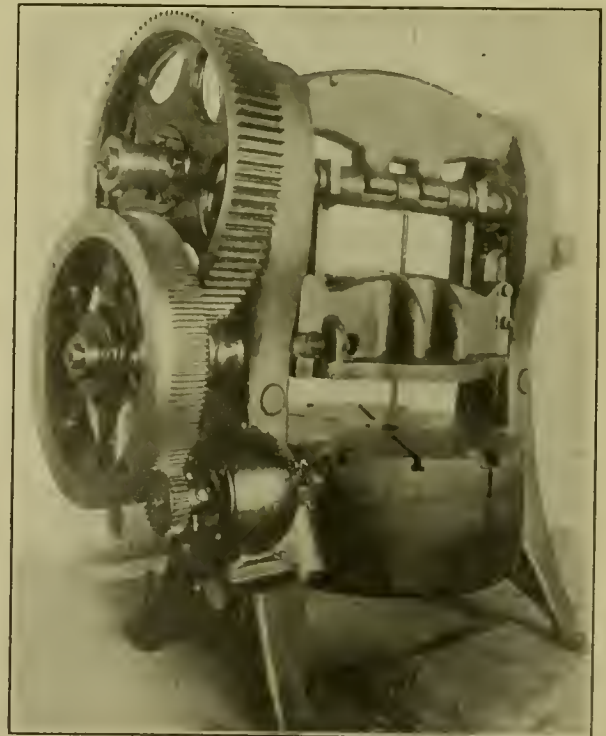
CONSTANT SPEED DRIVE FOR A HEAVY FERRACUTE PUNCH PRESS.—NORTHERN ELECTRIC MFG. CO. MOTOR.
